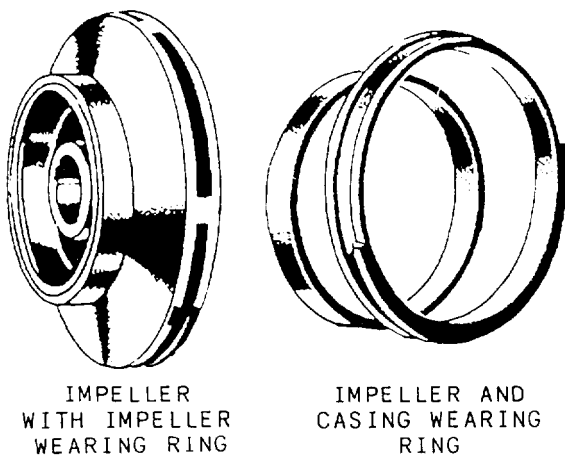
Impeller, impeller wearing ring, and casing wearing ring for a centrifugal pump.
